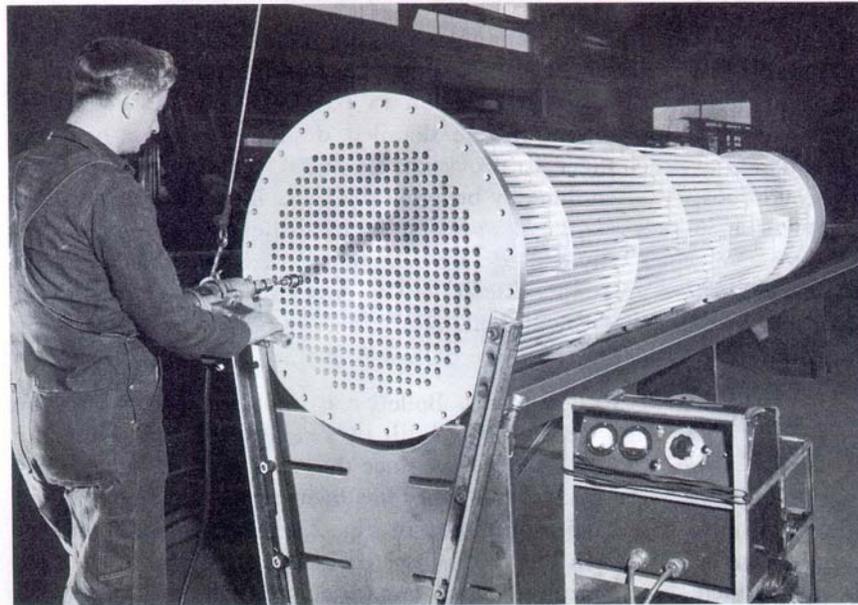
Photo showing tubes being rolled into the header sheet of a shell-and-tube heat exchanger. (Courtesy Patterson-Kelley Co.)
